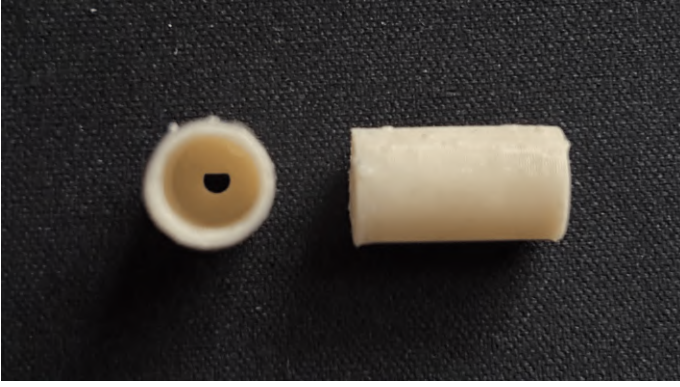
Precision resin wheel fabricated as structural support for the elastomer wheels.
